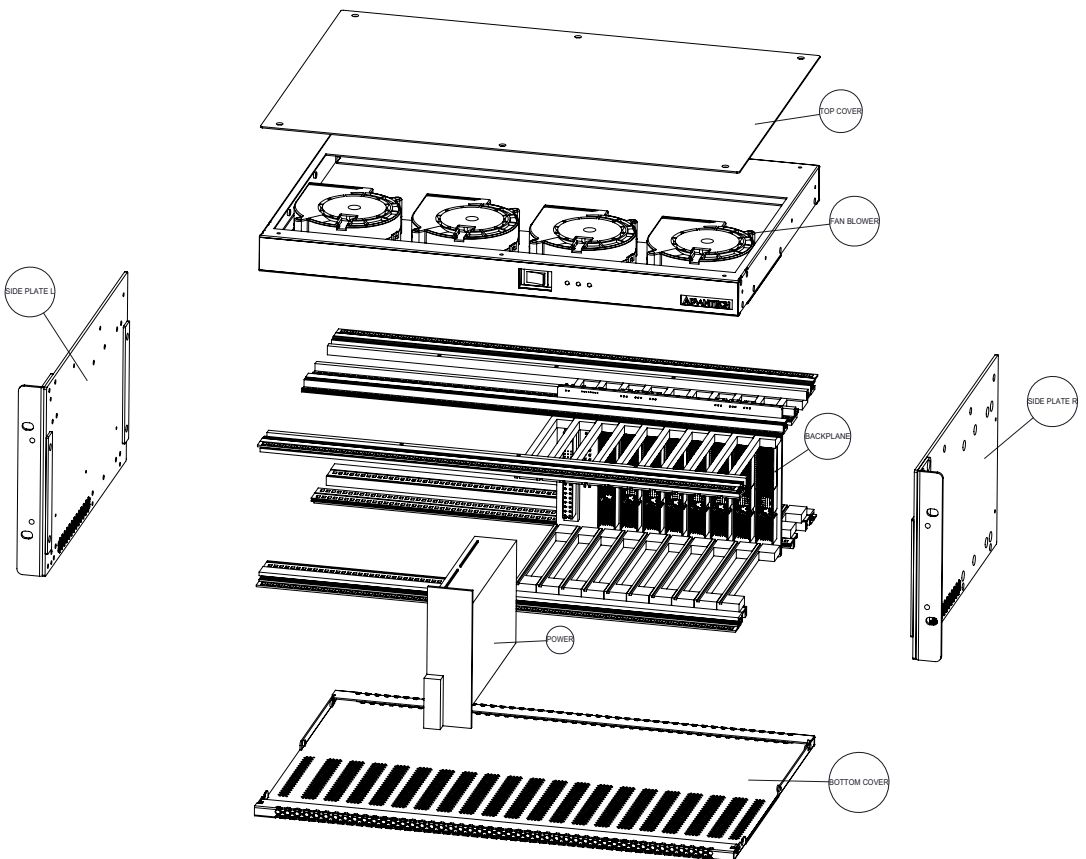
MIC-3022 with COMPACTPCI Power Supply Explosion View
